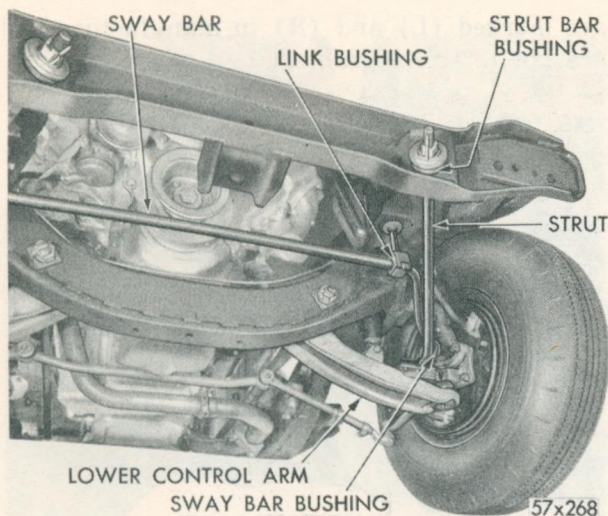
Lower Control Arm, Strut and Sway Bar Assembly
